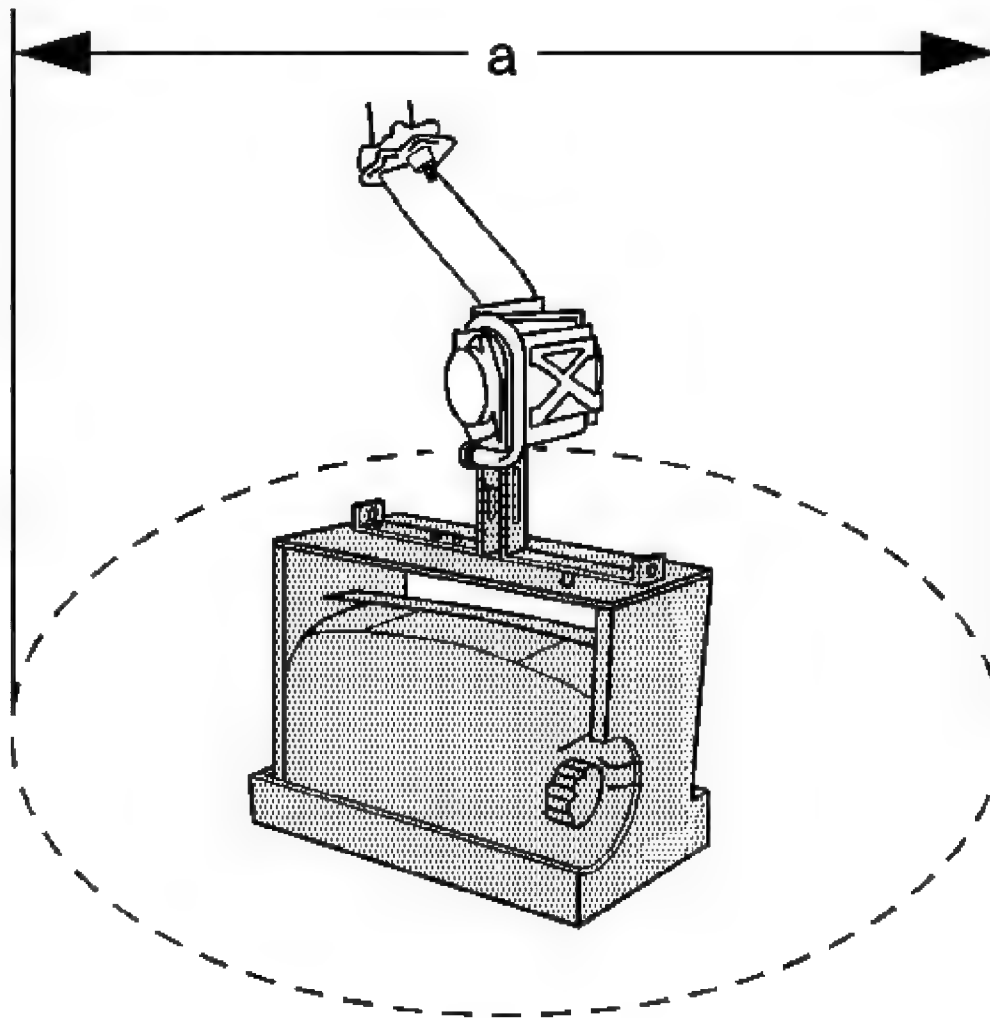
Illustrating Proper Space For Deployment Of Pretensioner
